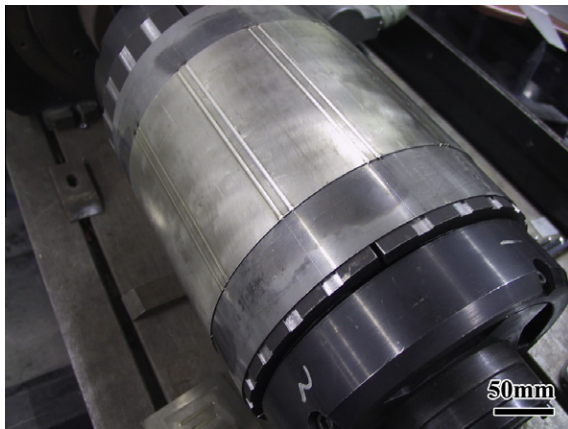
The completion photo of laser penetration welding between the core and inner cylinders.
